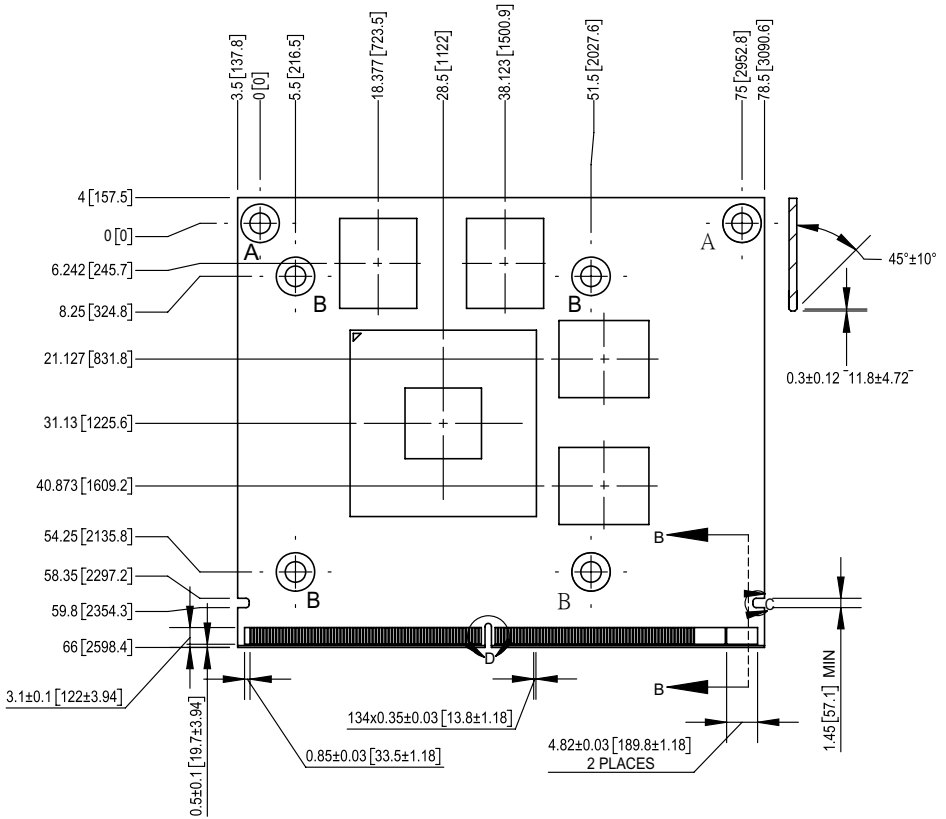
MXM Module Detailed Dimensions and Component Layout
